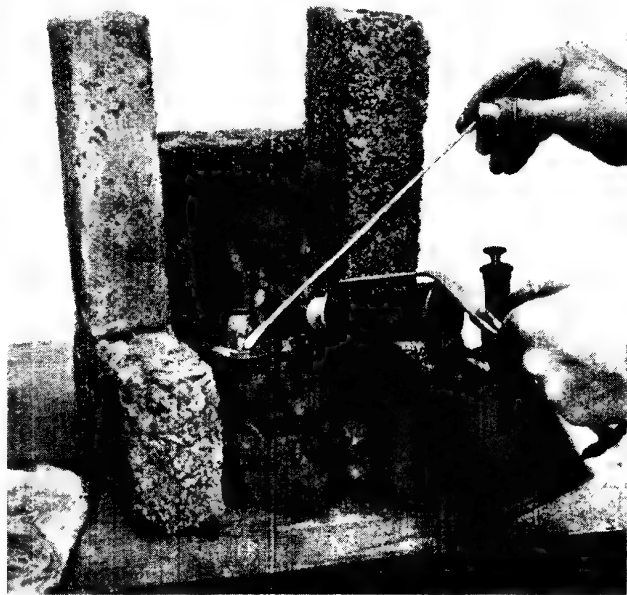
Placing the strip of silver solder on the joint. Note the tweezers holding the silver; the borax flux is already laid on
